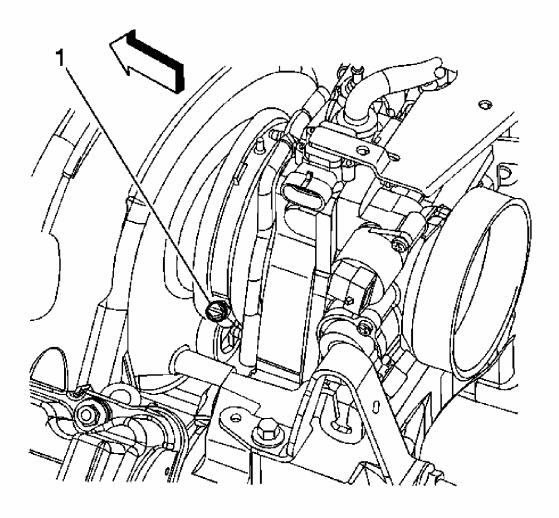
Locating Plenum Duct Clamp Screw Courtesy of GENERAL MOTORS CORP.
